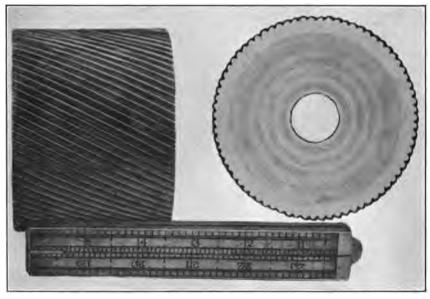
SPIRAL-CUT BURR, SIX TO THE INCH. (Advance 1½ inches in crossing 3-inch face.)
